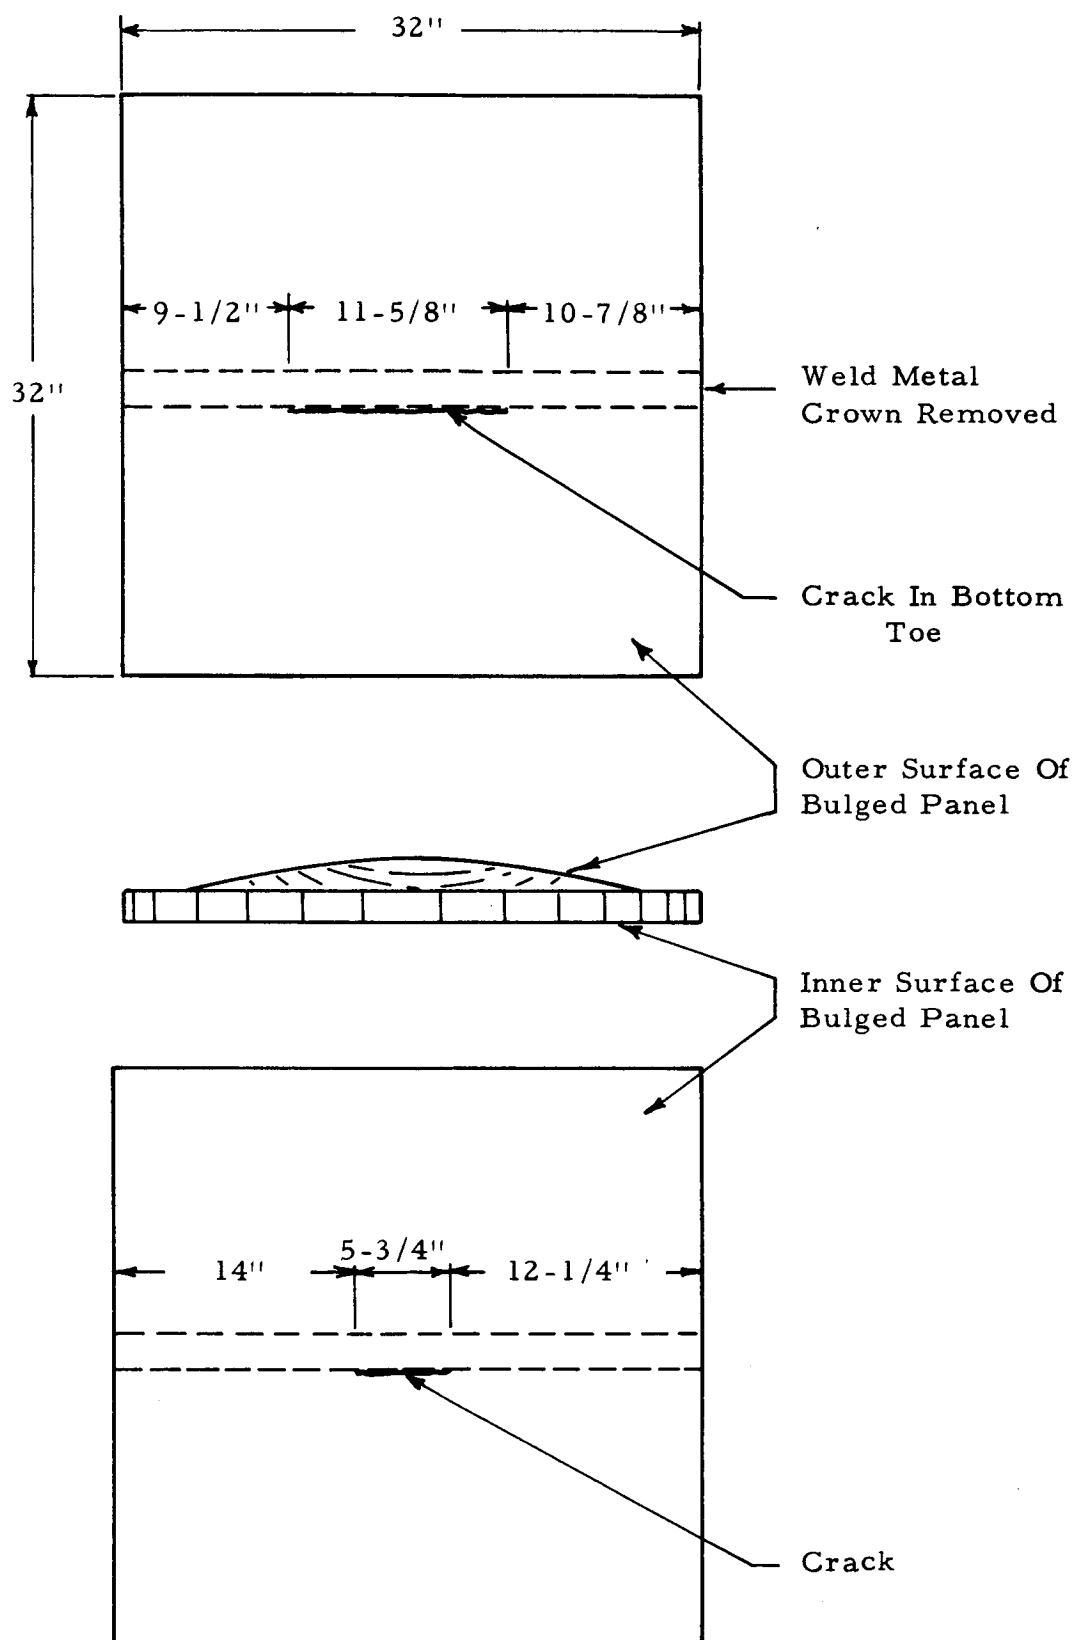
LOCATION AND MEASUREMENTS OF SURFACE CRACKS IN PANEL B. Weld crowns ground flush with base metal.
